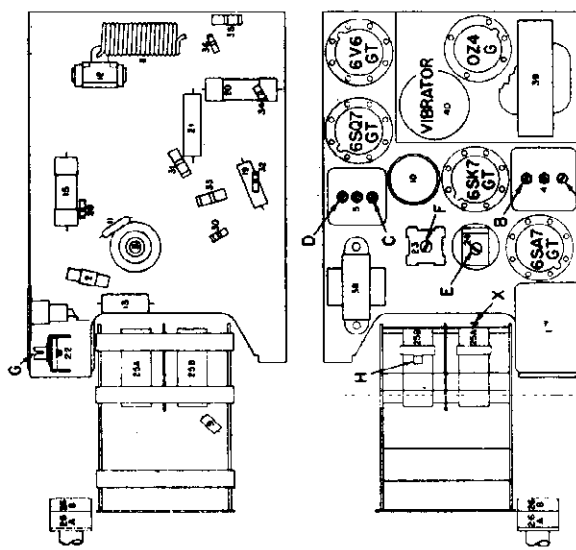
PARTS LOCATING DIAGRAM (TOP AND BOTTOM VIEWS)
